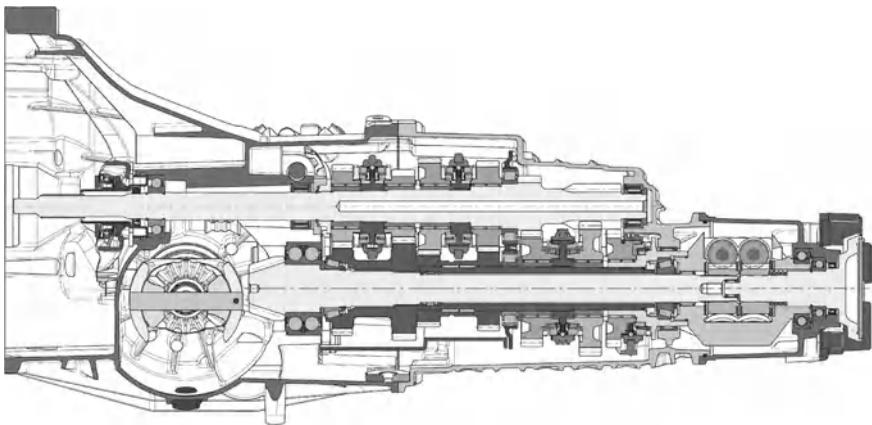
Gearbox, differential and transfer box of a permanent all-wheels drive car with longitudinal front engine (courtesy of Audi). The gearbox output shaft is hollow, to install the front wheel drive shaft
